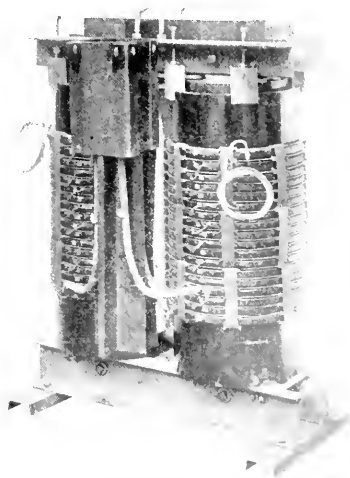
TRANSFORMER COMPLETELY ASSEMBLED AND READY FOR PLACING IN TANK
